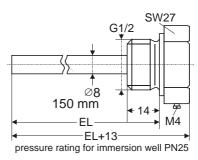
TF21, TF31 immersion well dimensions (in mm)
